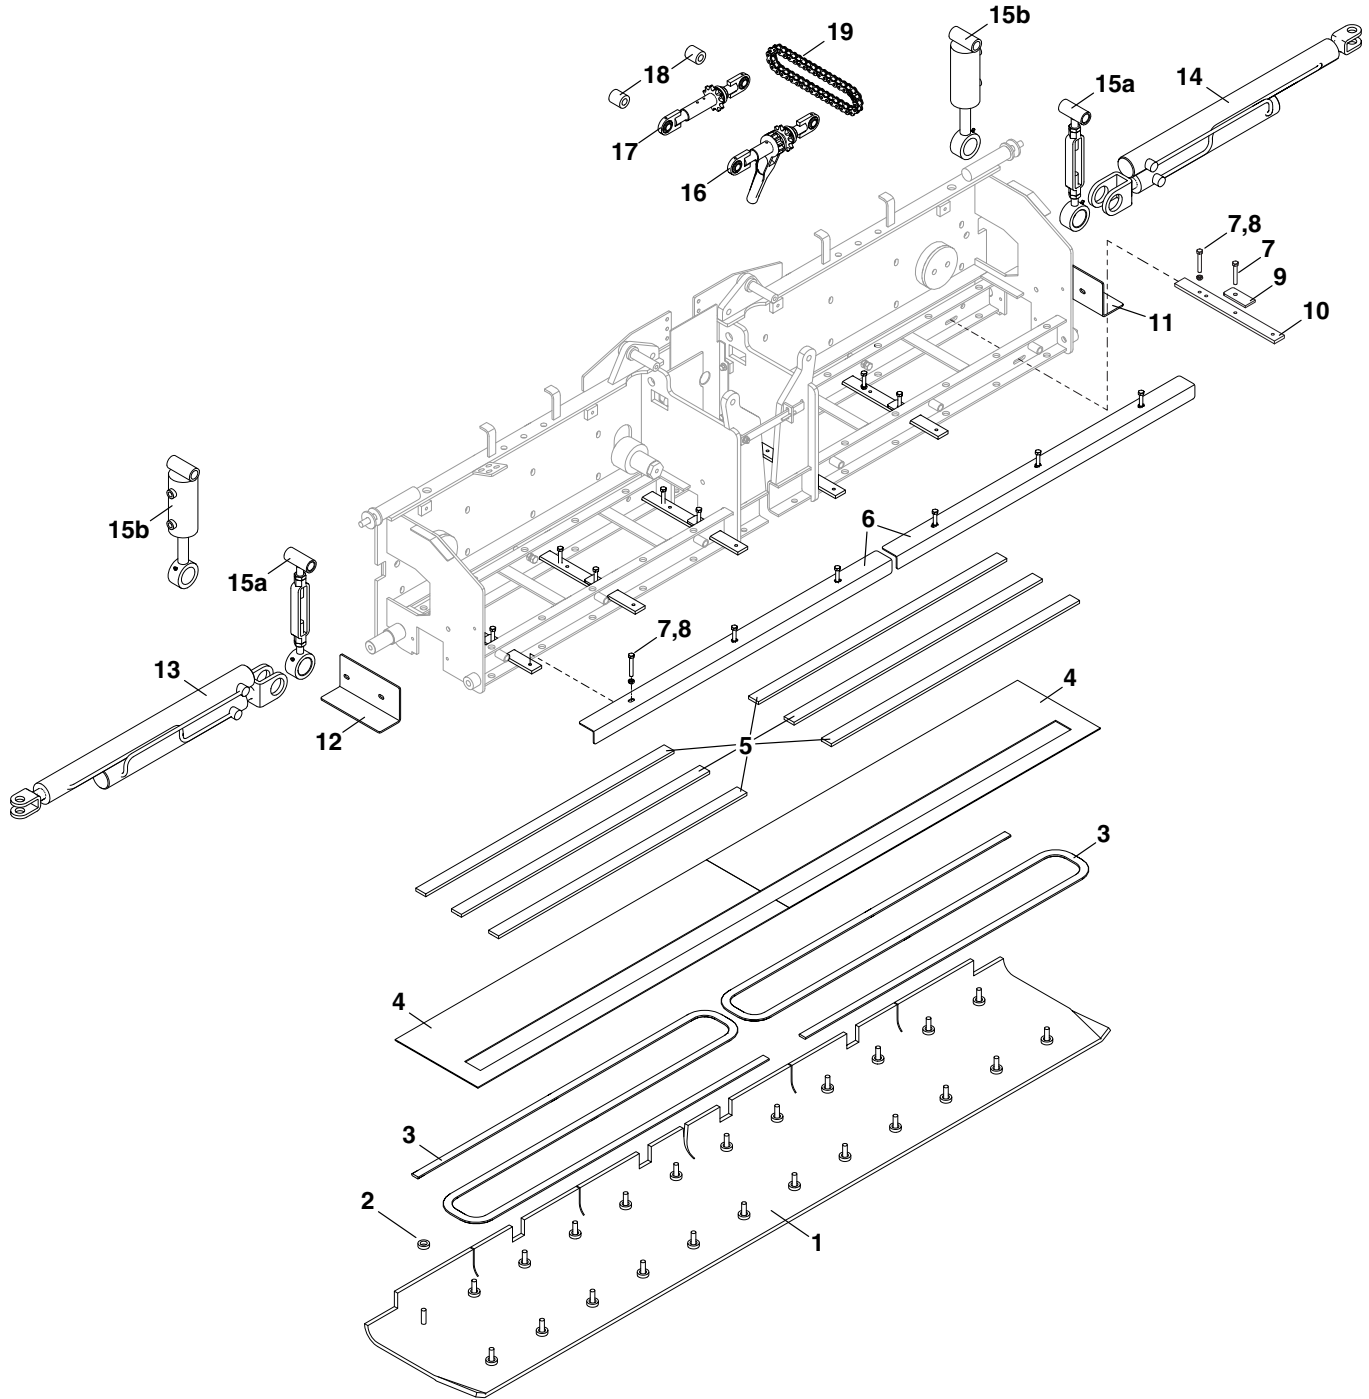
HD Screed Frame Assembly (2 of 2)
